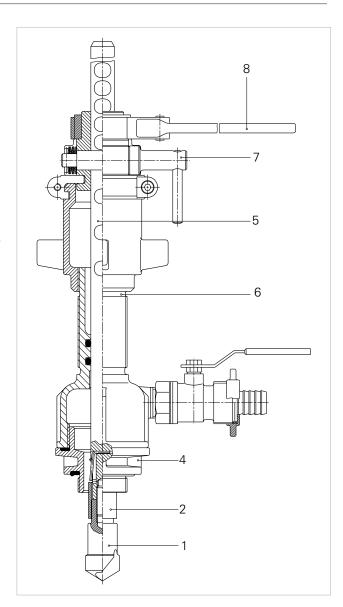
Drilling machine assembly with drill bit for cast pipes
